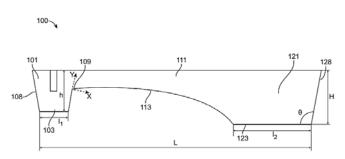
B illustrates the cross-sectional view of the improved tundish design.
